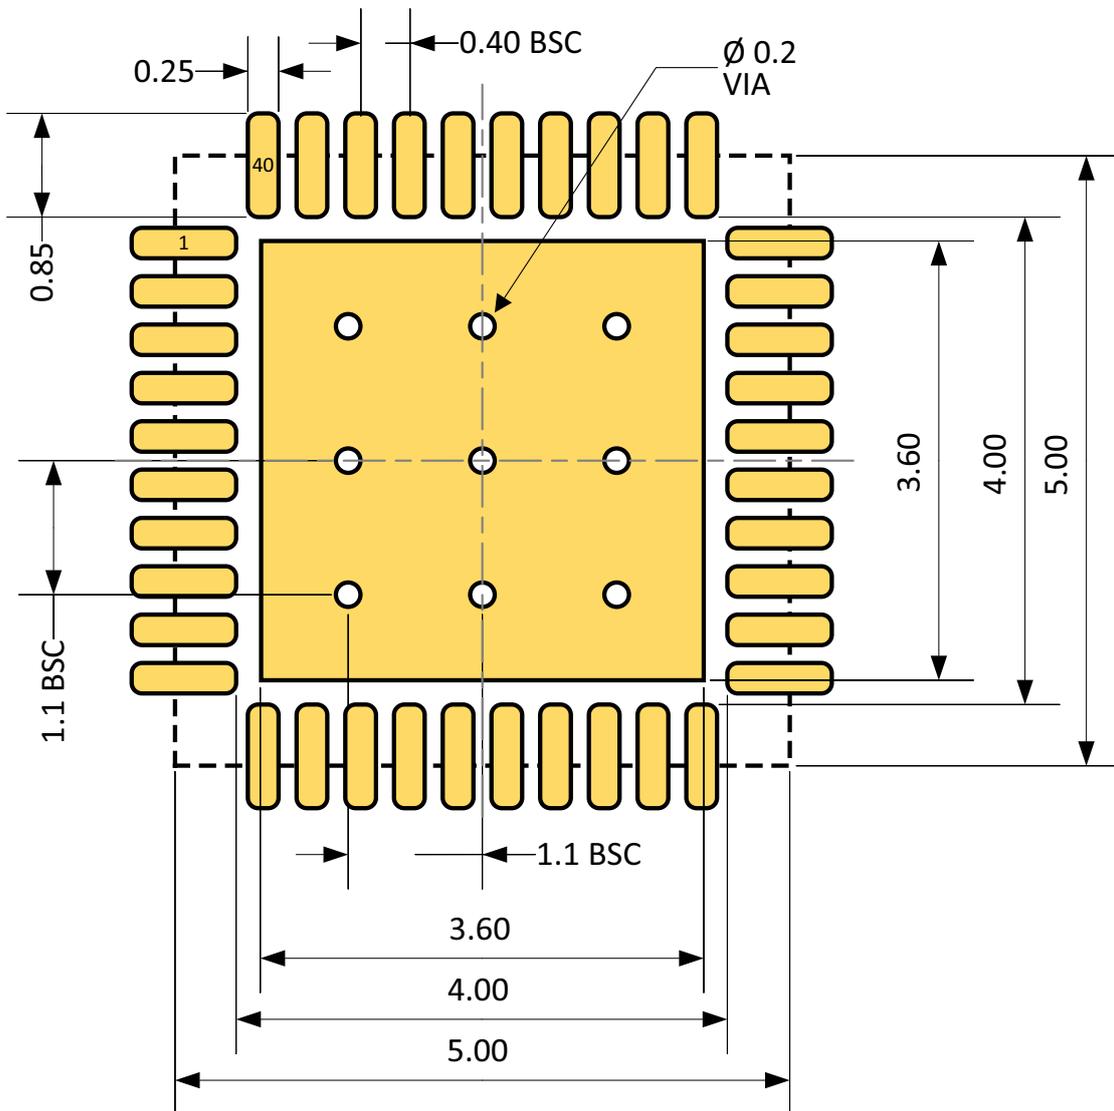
Recommended board layout for QFN40 package (all dimensions in mm)
